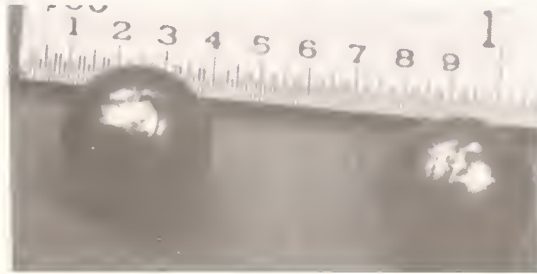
Damaged hanger bearing removed from UH -1H helicopter.
